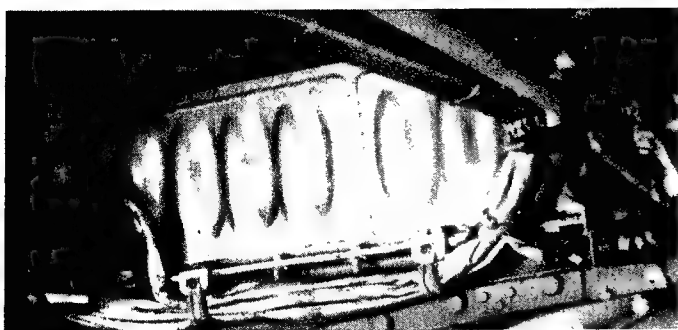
The MiG-29 torque box/fuel tank is a welded steel structure designed to carry concentrated wing loads and landing gear loads.
